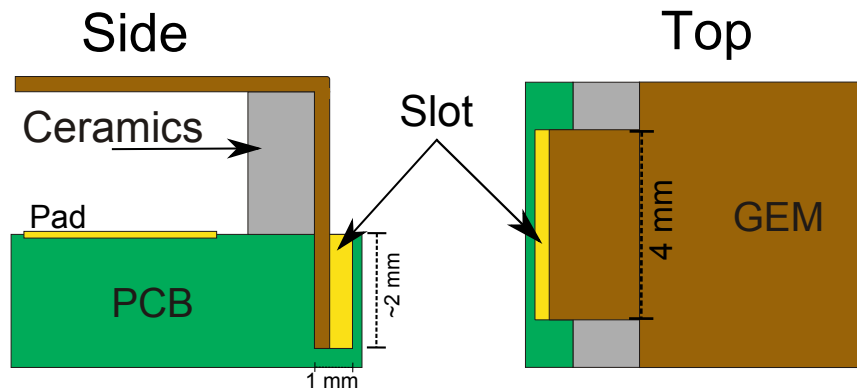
Scheme of the connections between the GEM electrode and the PCB power line. The GEM electrodes, in brown is inserted in a slot of the PCB that is filled with solder to fix the connection. To reduce the necessary clearance between the high voltage connection and the sensitive (grounded) pads, the ceramic frame is interposed.
